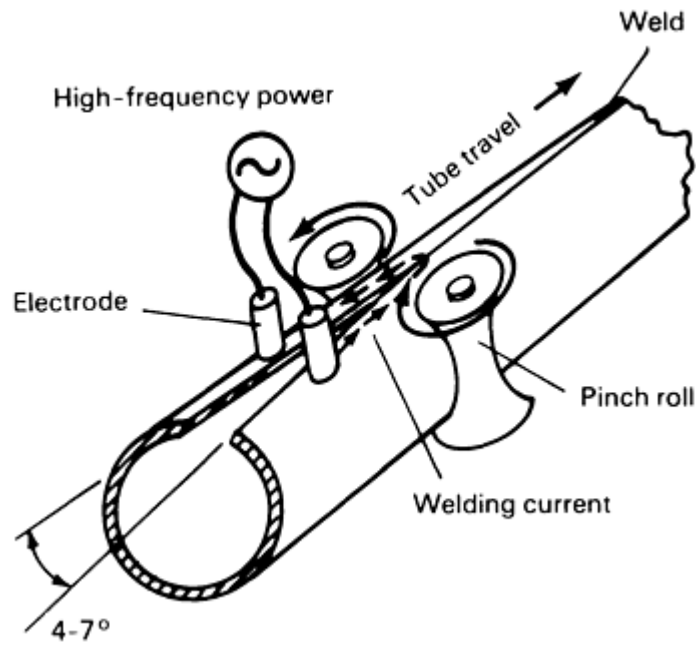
HIGH-FREQUENCY LONGITUDINAL BUTT SEAM WELDING OF A TUBE
